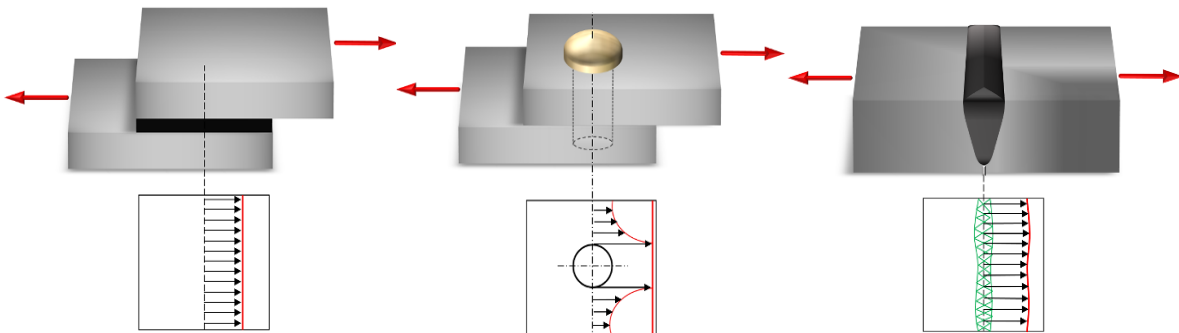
Stress acting on different types of joints, from left to right: adhesive-bonded, riveted and welded joint.
